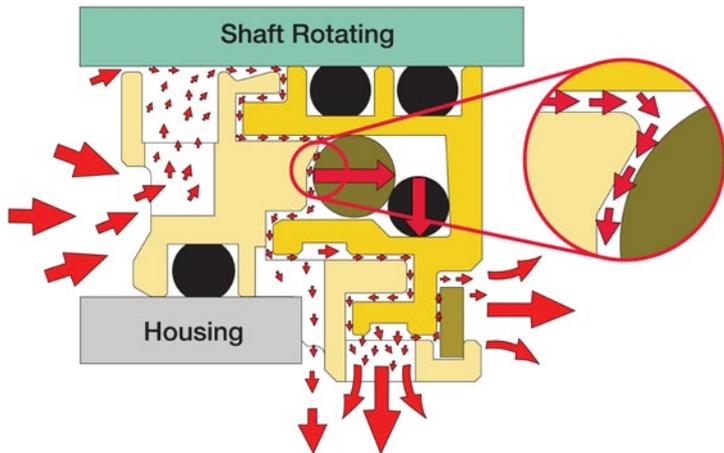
As the equipment rotates, the bearing housing heats up and the oil/air mixture inside heats up, forcing air through the seal
